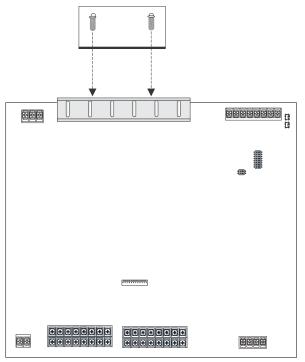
ECS-DUAL50WBD Mounting Bracket
